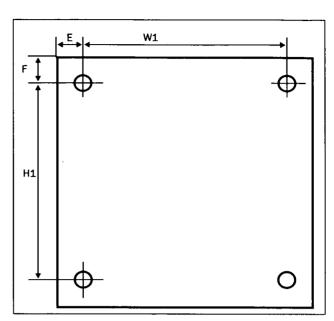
Hole pattern for screw attachment, MSF-310 to MSF-835. Hole distance (mm).
